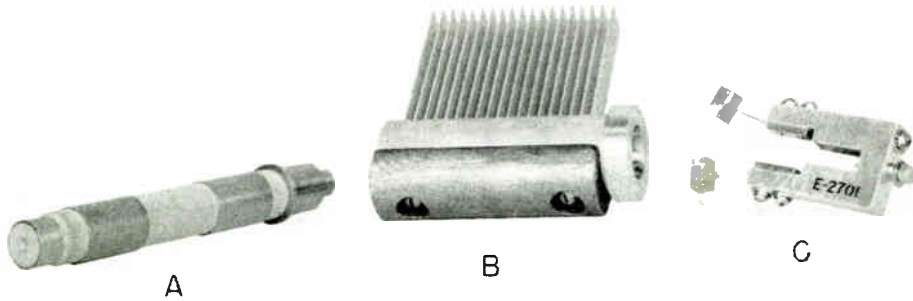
Rotor assembly of variable capacitor voltage divider. A. Steatite shaft; B. Rotor blades on hub; C. Brush assembly.
